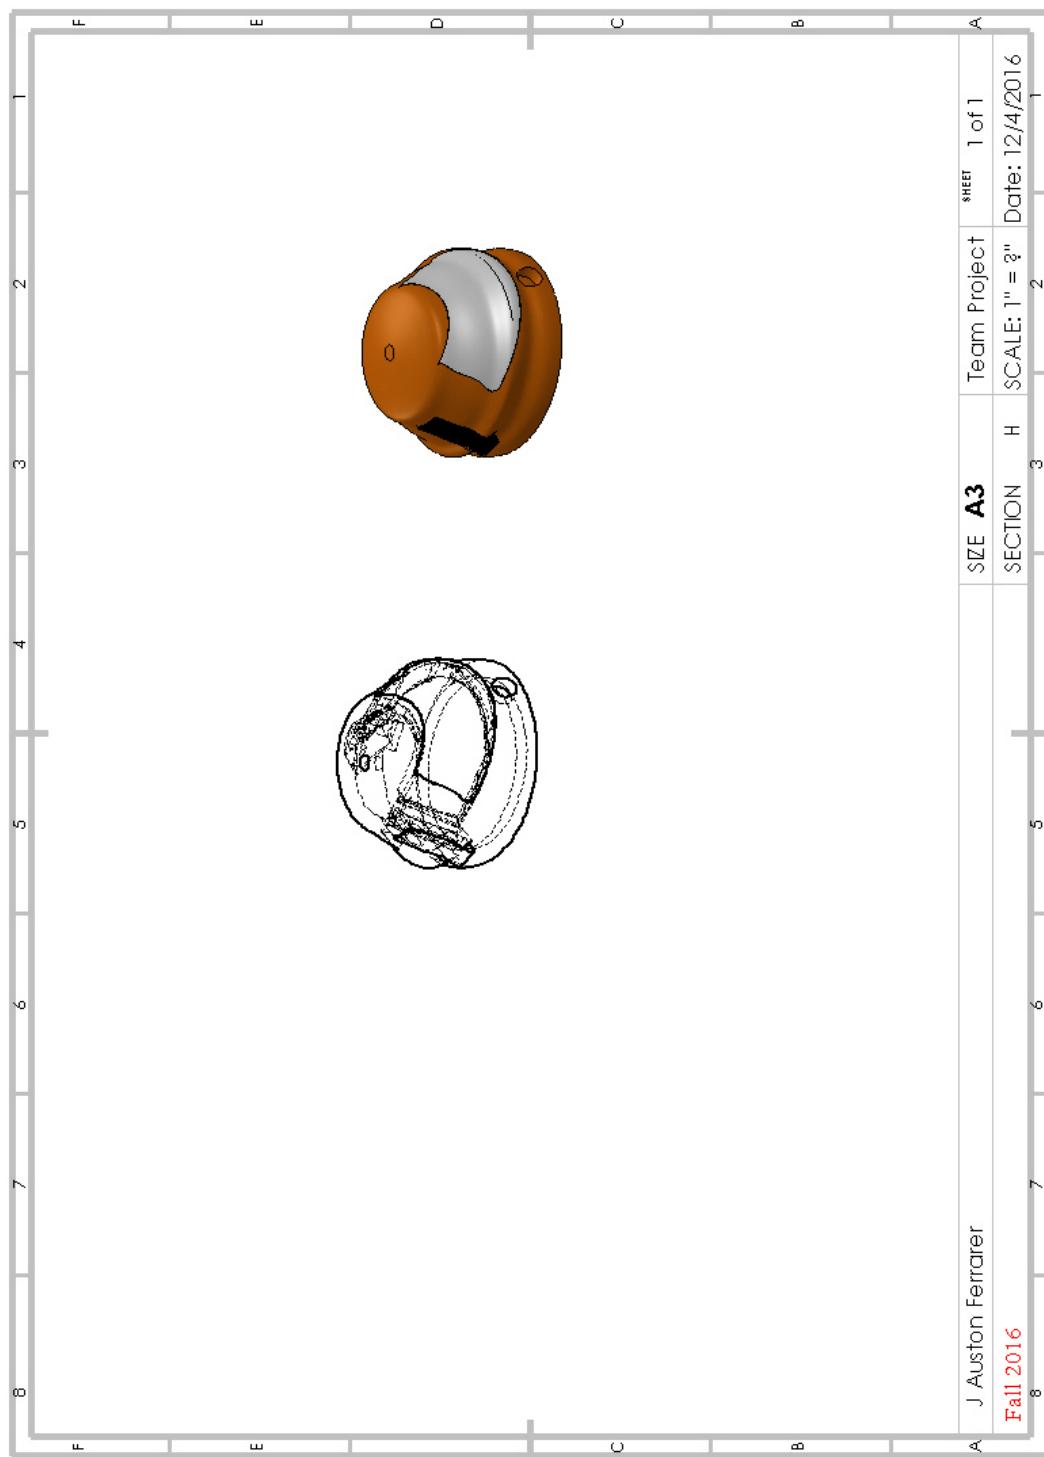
Ferrarer, Auston: Helmet Full Assembly
